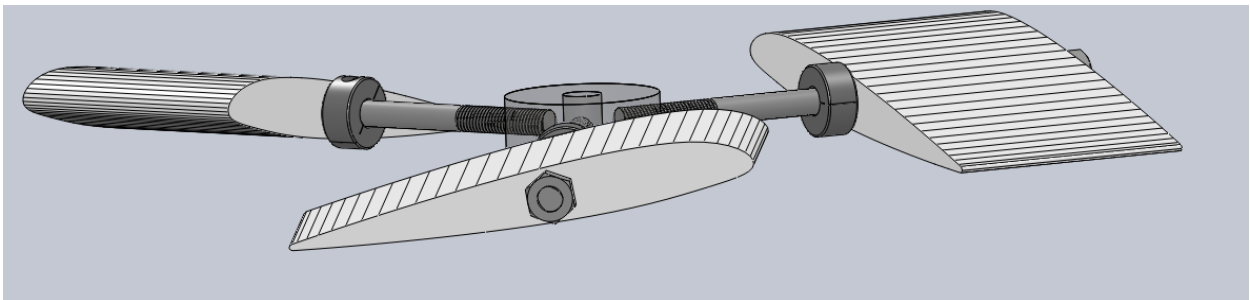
Attachment of Hydrofoil Shaft to Hydrofoil Hub
